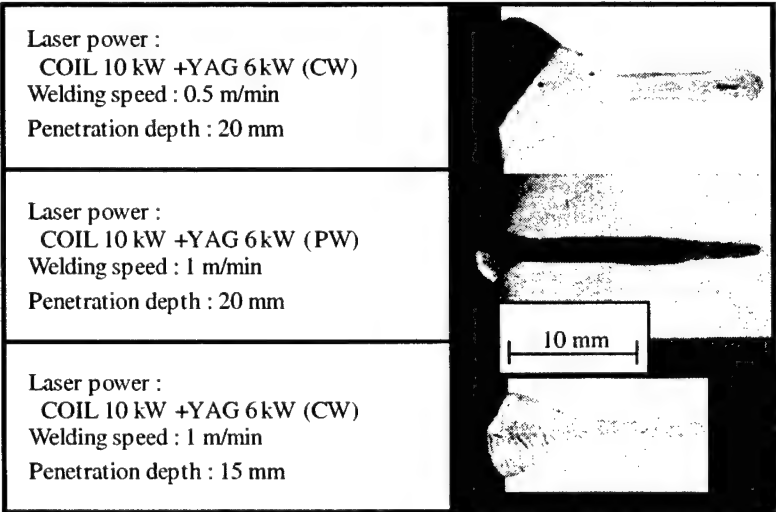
Welded beads with combined beams (type 304 stainless steel)
